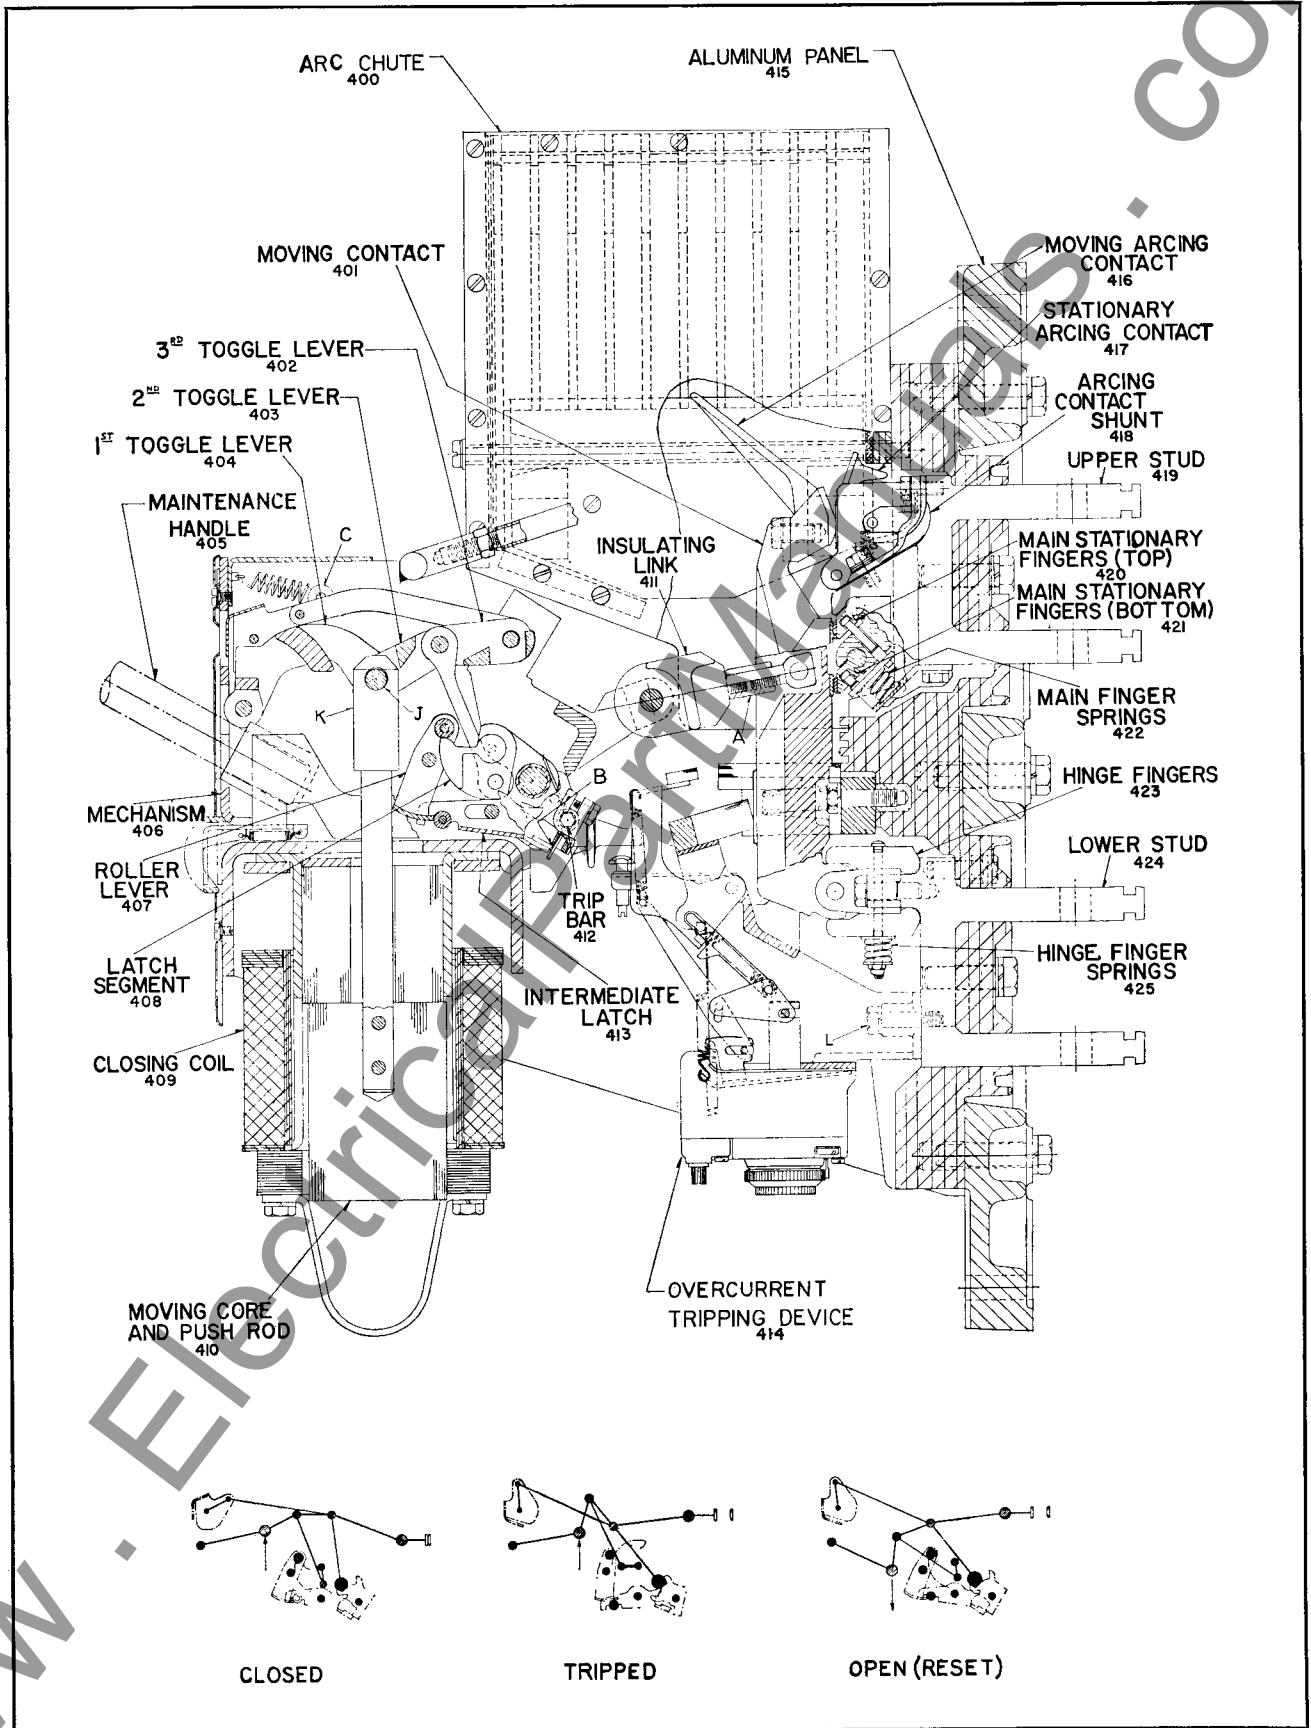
Cross-Sectional View of Air Circuit Breaker
